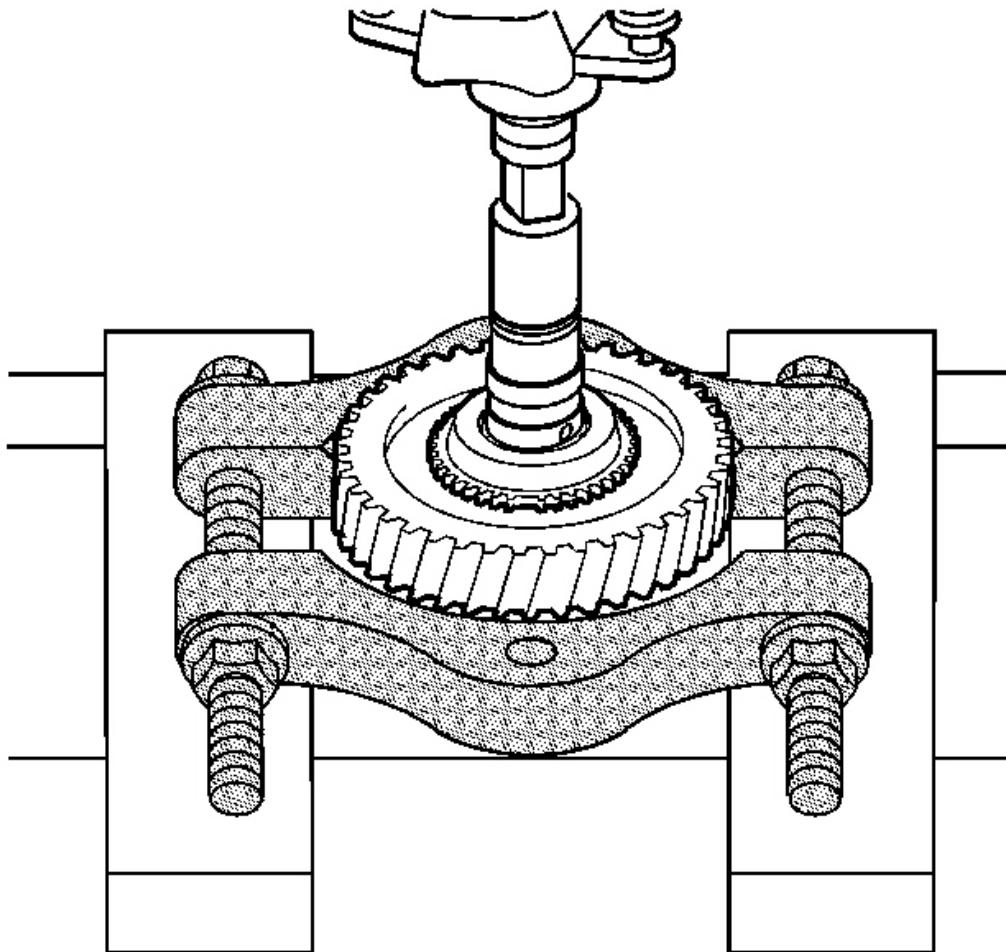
Removing Reverse Gear Spline & 1st Gear
